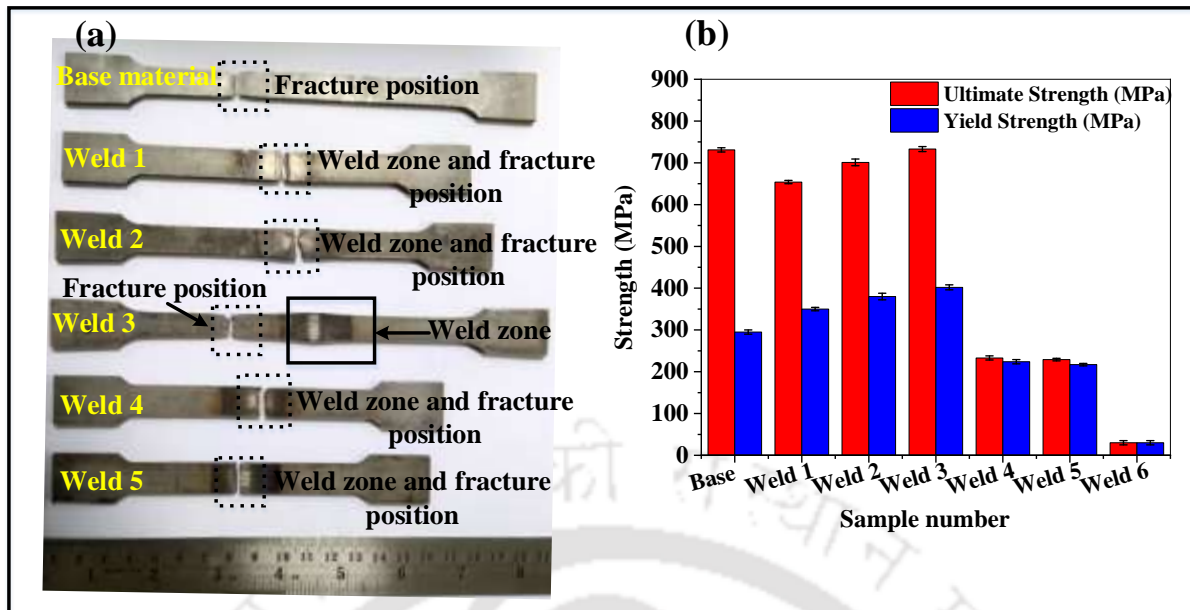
(a) Top view of FSW welded tensile test specimens and (b) their respective tensile test results.
